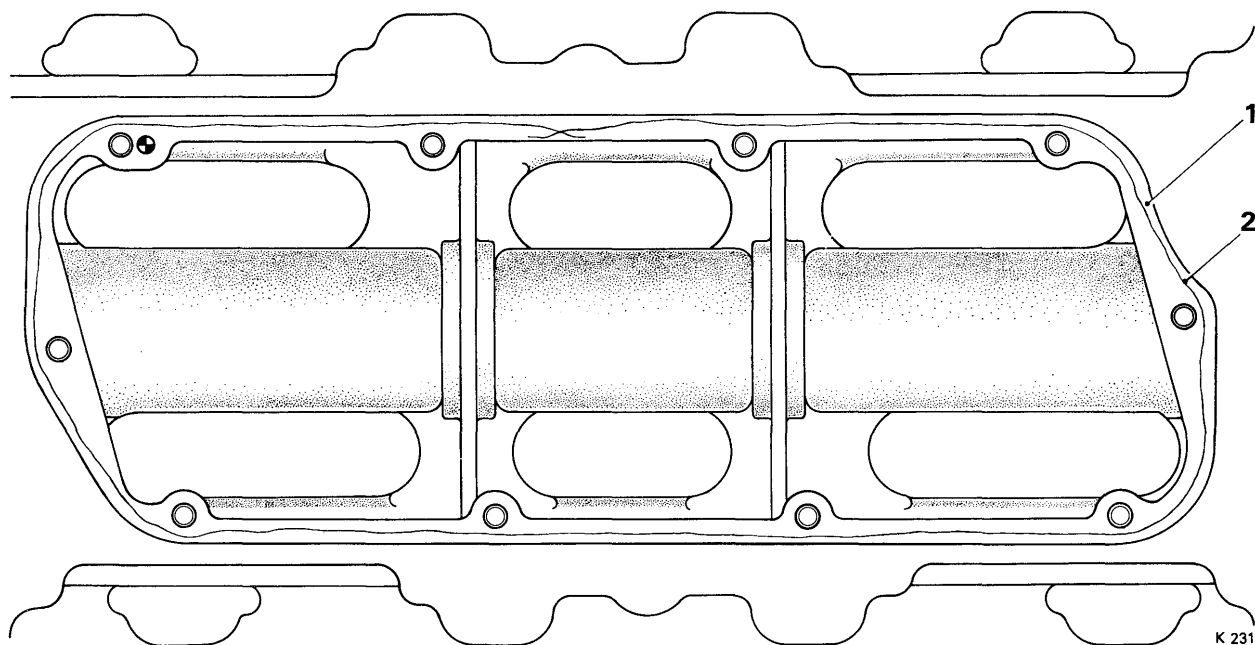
SILK SEALING THREAD IN POSITION ON THE CRANKCASE FACE
